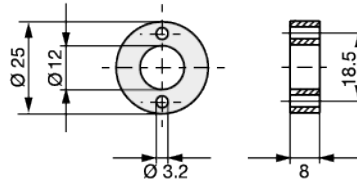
Installation dimensions of BTL-P-1012-4R magnet
